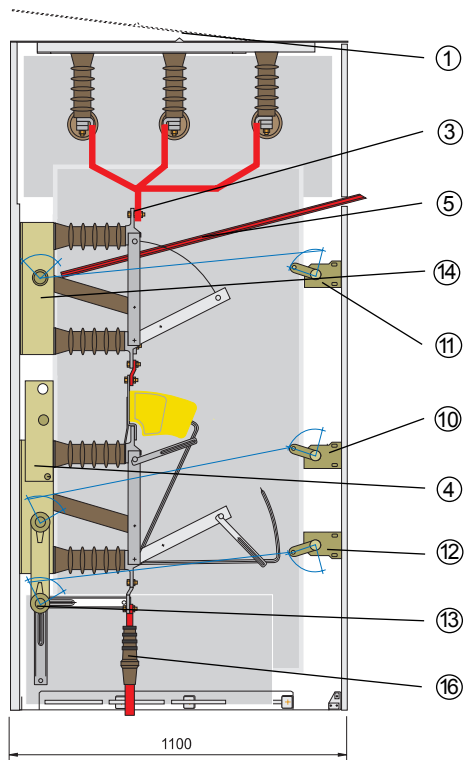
24 kV Cable panel with disconnecting switch and switch-disconnector H 22
